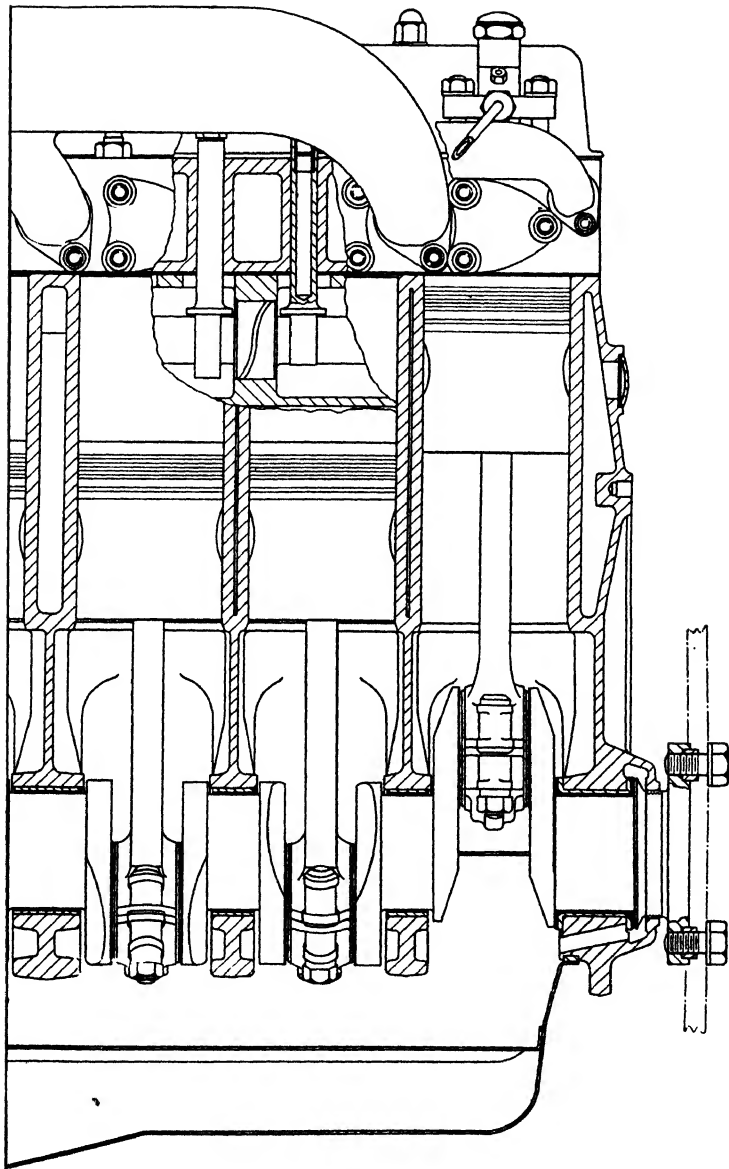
B.—LONGITUDINAL SECTION OF PERKINS ENGINE, REAR HALF.
